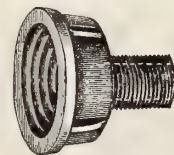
Coupling small end cut 1/4-inch pipe thread to fit our spray nozzles, large end cut to fit 3/8-inch, 1/2-inch or 3/4-inch male hose coupling.
